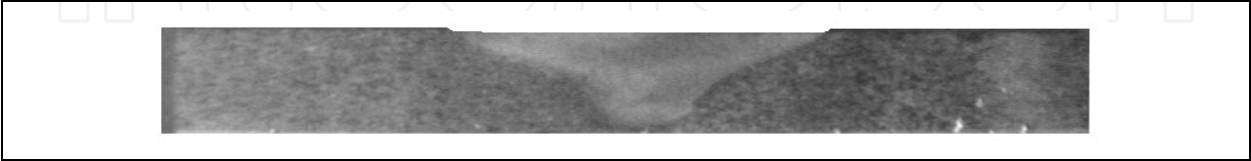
Image of the weld between two 6013 alloy plates.
